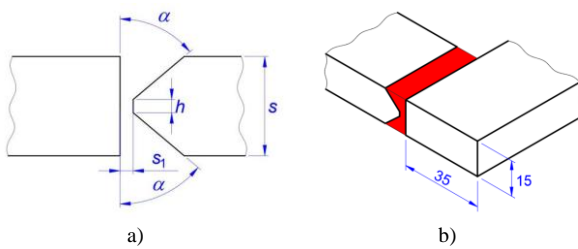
a) Preparation of material for K-joint welding, b) Welded K-joint
